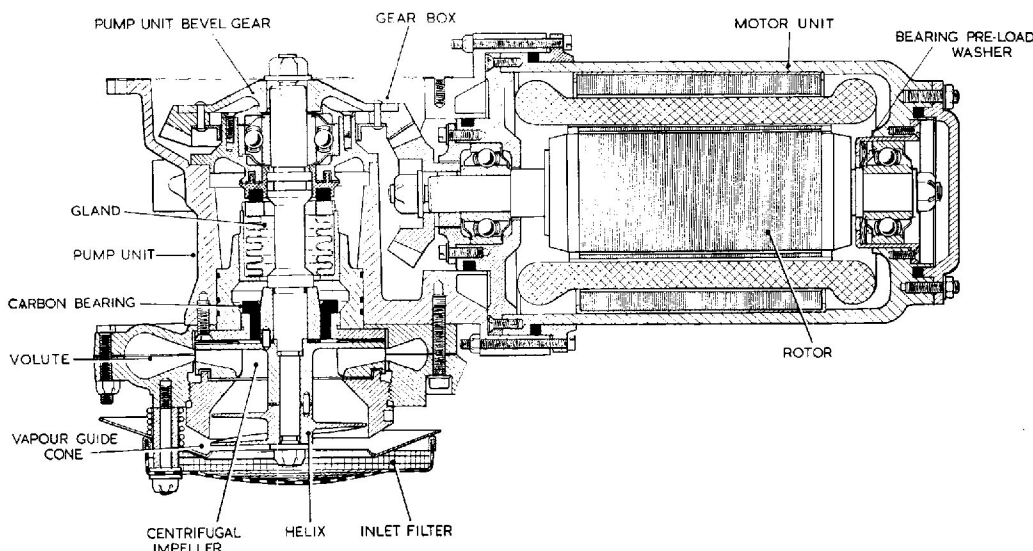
Typical SPE. 1230 series pump and motor unit assembly
